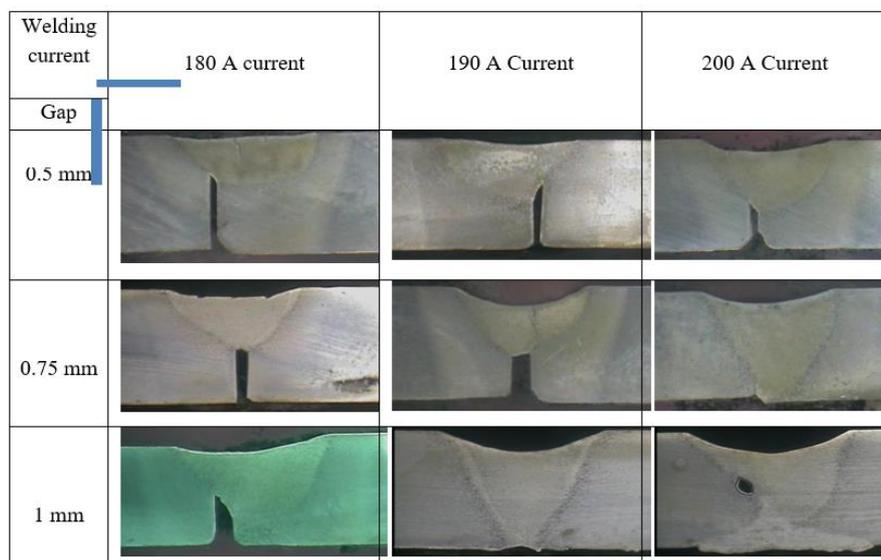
Optical microscopic Image at weld zone of TIG welding done with different welding current and gap between workpiece
